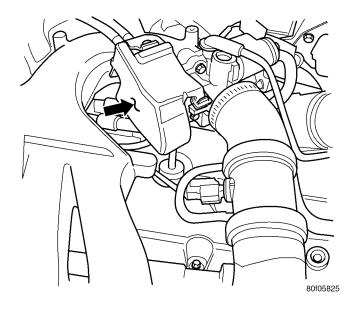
THROTTLE CONTROL SHIELD - 2.4L TURBO
